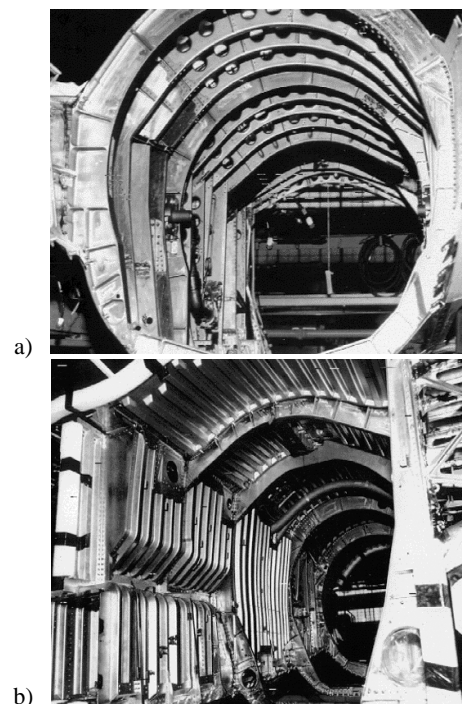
F-15E aft fuselage: conventional assembly (a) and SPF/DB structure (b) [41]
